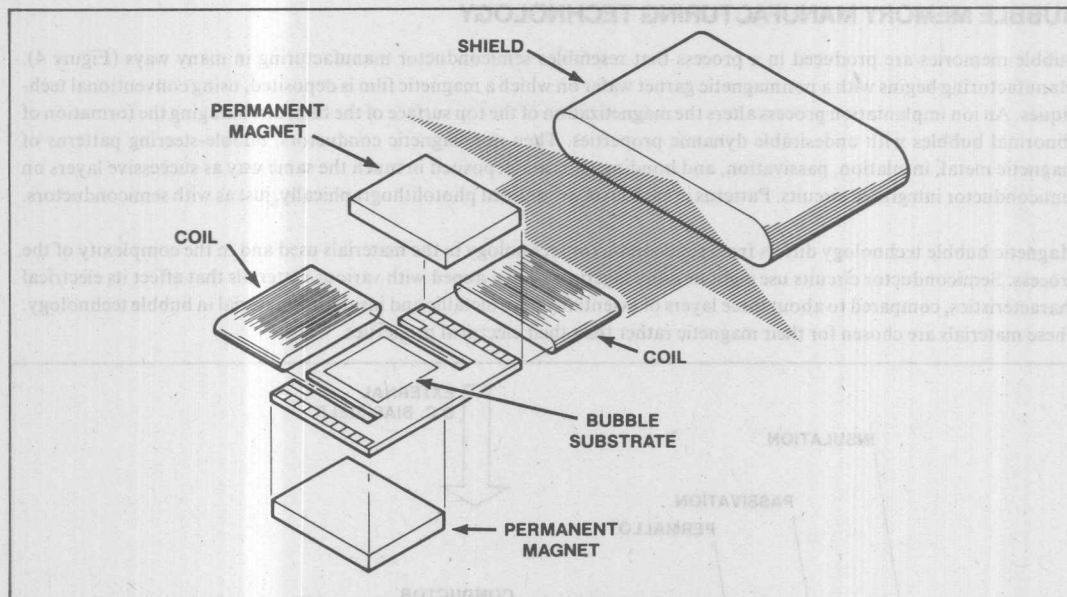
Magnetic Bubble Unit Assembly—Exploded View
